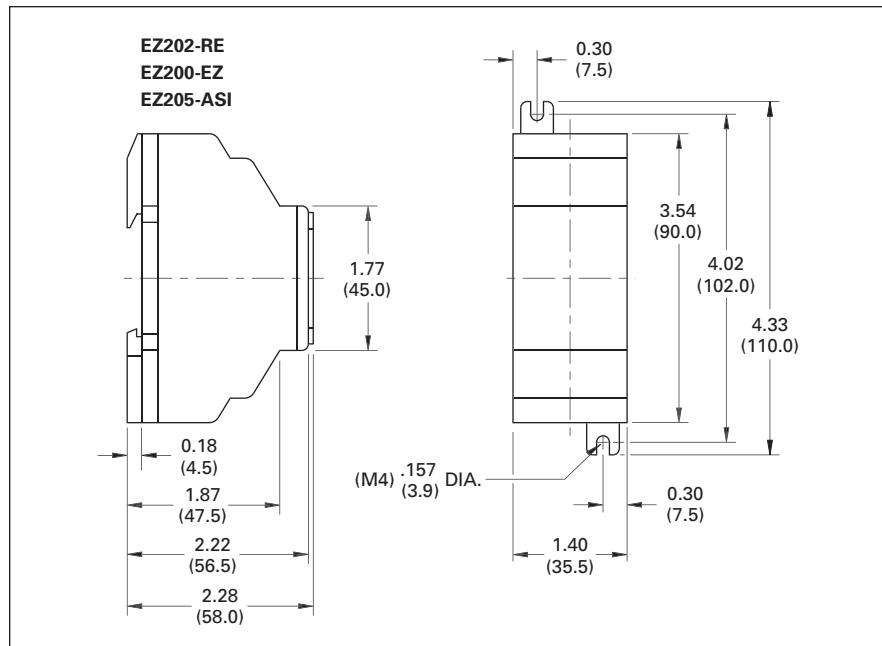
EZ202-RE/EZ200-EZ/EZ205-ASI Series Dimensions in Inches (mm), Drawing Number MD05013012E
